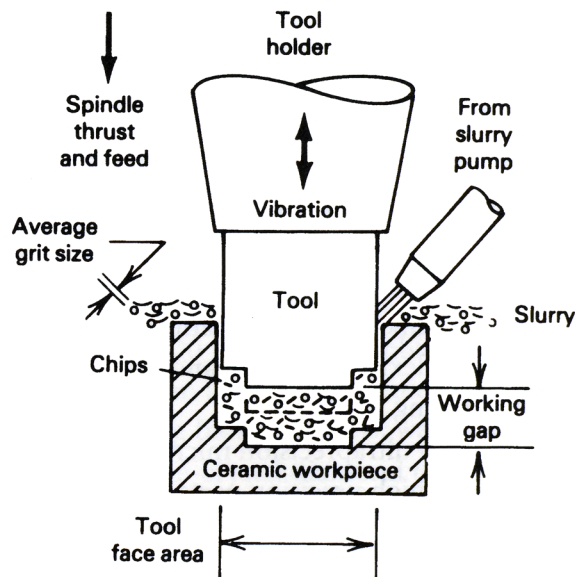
USM tool setup used to machine ceramics [Mor92].
